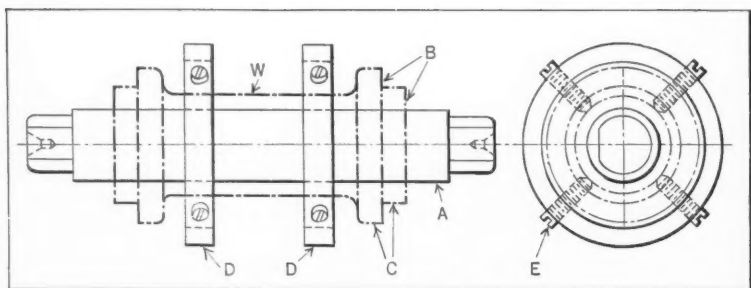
Matched Halves of Bearing Mounted on Arbor for Turning and Facing Ends
